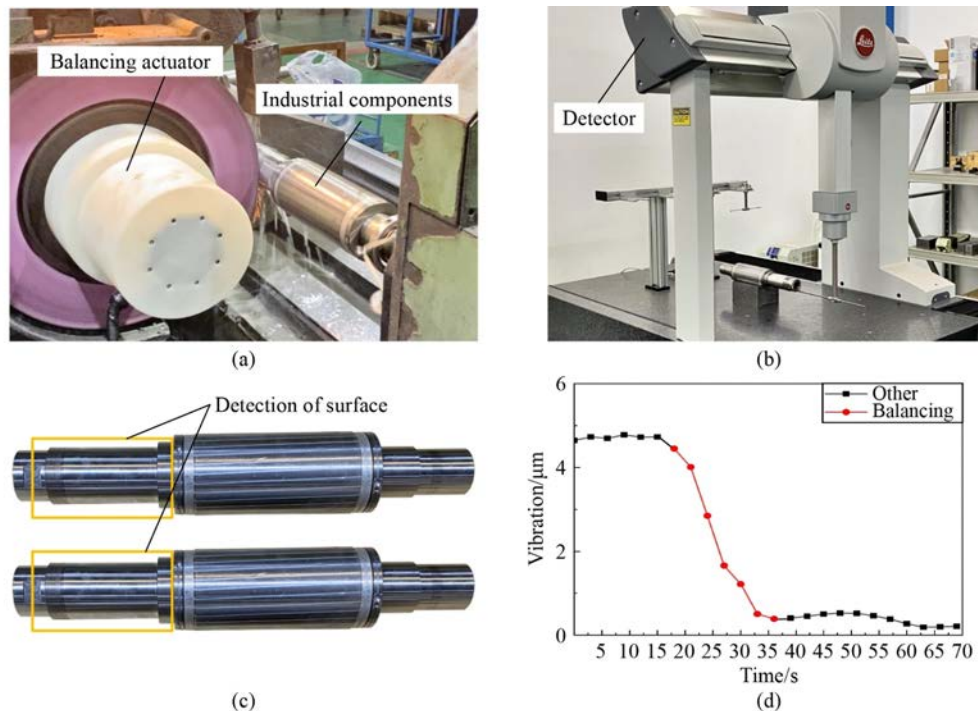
Experimental results of machining workpieces: (a) processing site, (b) performance testing, (c) workpieces to be processed, and (d) unbalance vibration self-recovery regulation process.
